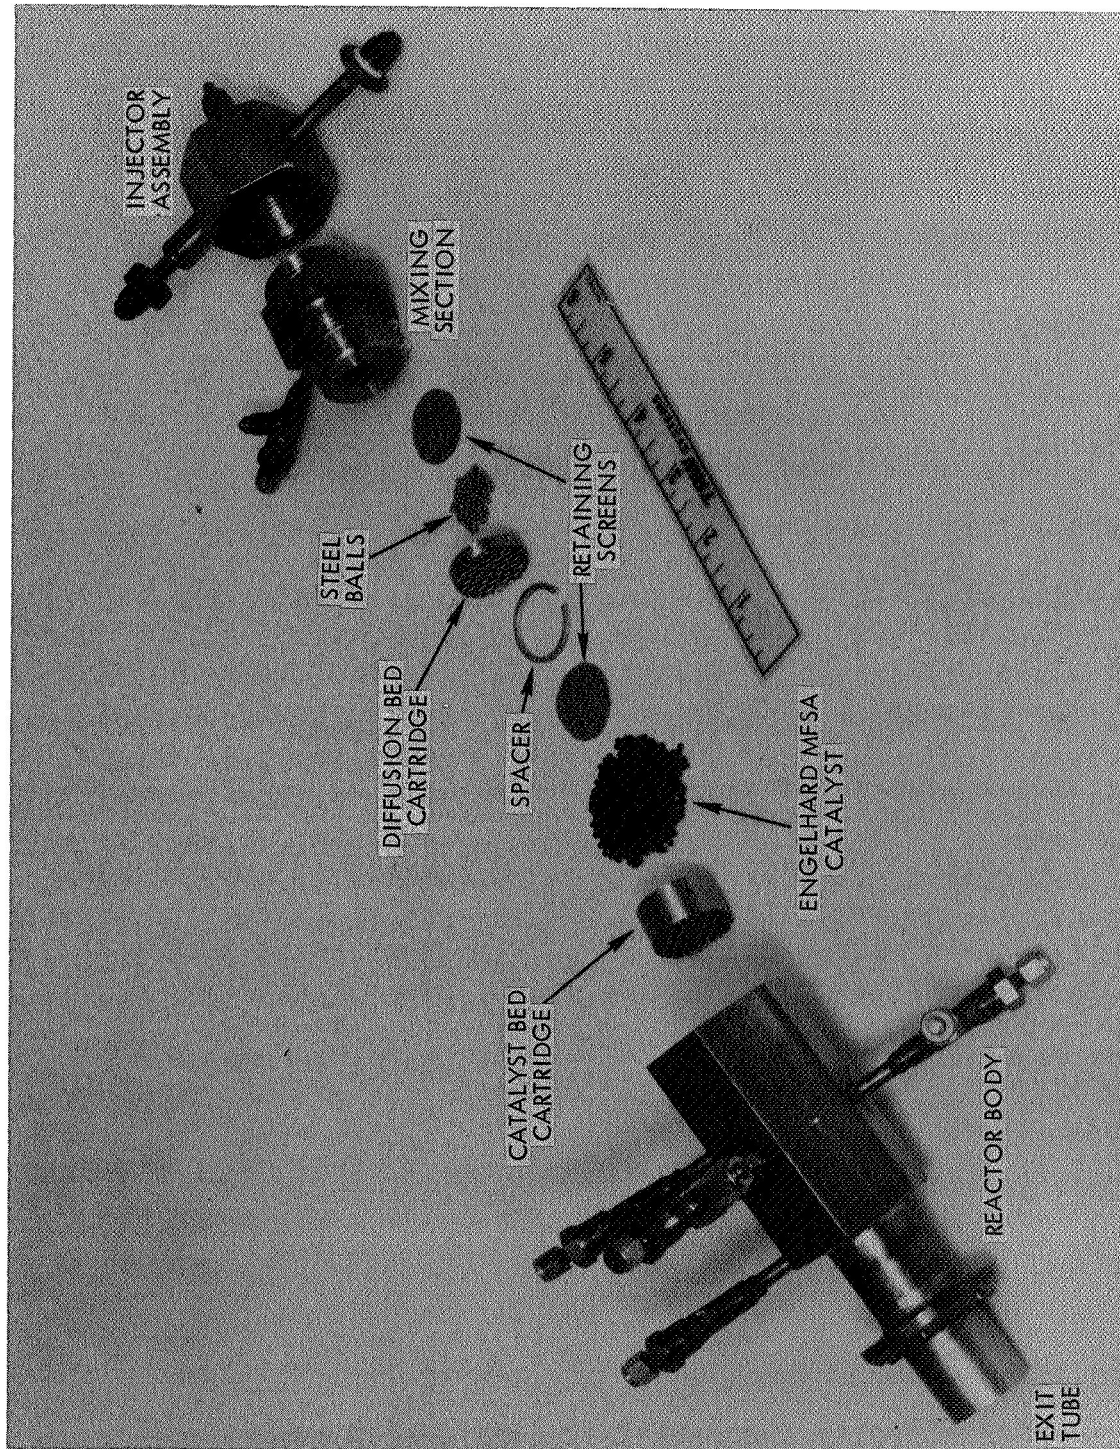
Disassembled Catalytic Reactor Igniter – Low Chamber Pressure Thruster
